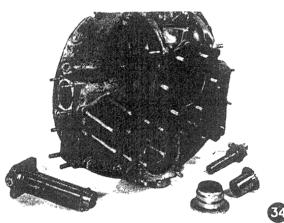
Supercharger rear housing and cover which together form the housing for the accessory drives. FIG. 33. Left to right: fuel pump drive support and shaft, intermediate supercharger drive gear, idler shaft, oil pump drive gear, idler with bushing partially removed, generator drive gear, accessory drive and starter shaft, magneto drive shaft, magneto drive gear, crankshaft coupling, accessory gear retainer, and spring and buttons. FIG. 34. Supercharger rear cover mounting accommodates fuel pump, oil strainer, oil pump, generator, starter, breather, propeller controls valve, accessory drive box and magnetos. Detached parts are: left to right, oil strainer, magneto shaft mounting and shaft, and propeller control valve. FIG. 35. Oil transfer parts supplying valve gear from crankshaft supply, left to right, cam drive gear, bracket and retaining nut, tube, oil transfer bracket and ring, front main bearing locating ring, crankshaft oil seal, and ring carrier.
